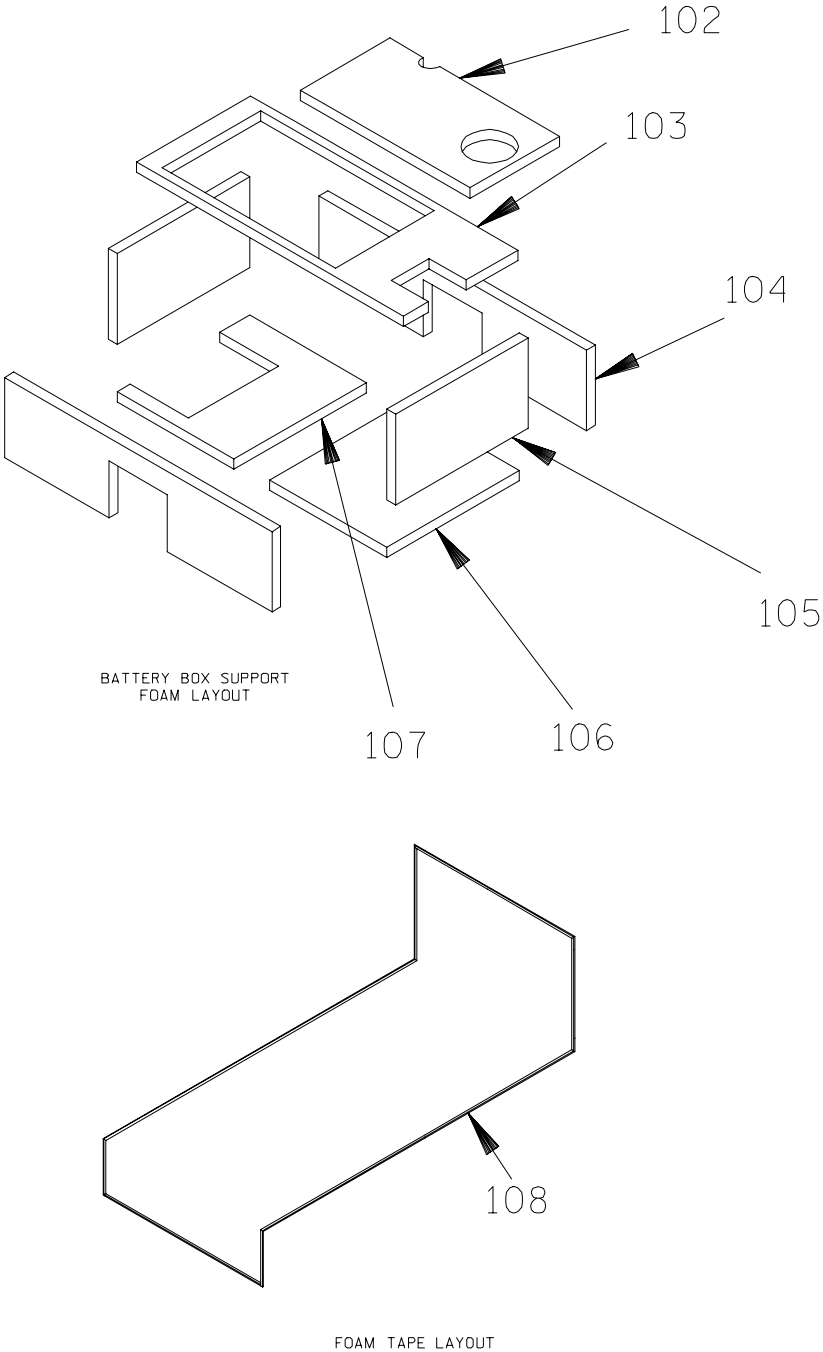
41583–747 Trailer Assembly (Cont'd)
